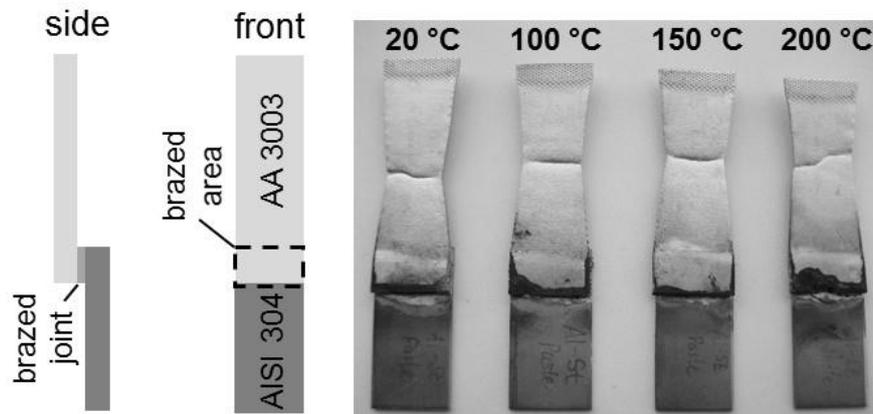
Fracture image of brazed aluminum / stainless steel samples
